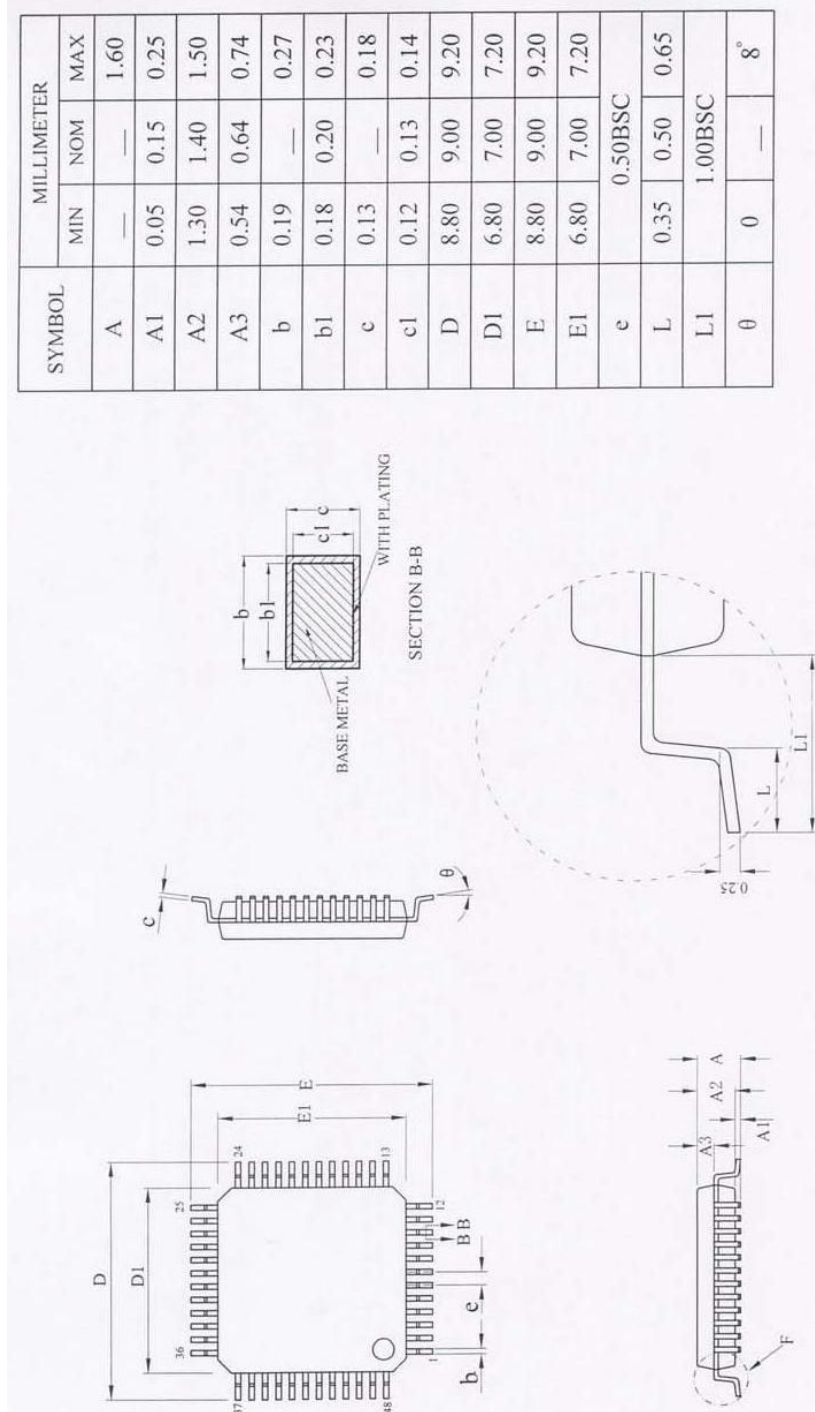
LQFP48-7x7mm Package Dimension Parameter
